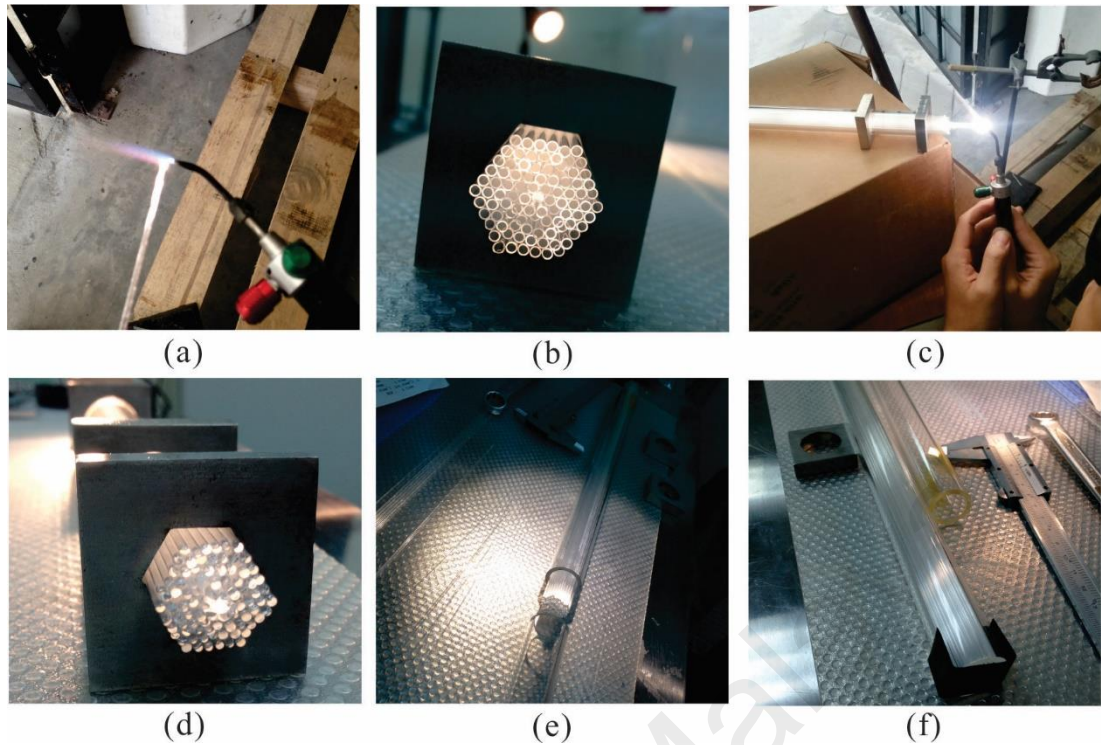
Sunny PCF preform assembly: (a) end sealing; (b) stacking; (c) creating sunny structure; (d) sealed side of the stacking; (e) jacketing; (f) Sunny PCF preform.
